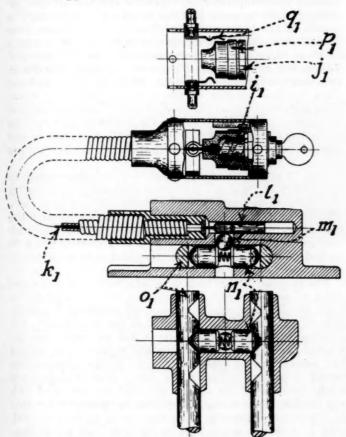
Main Units of the Transmission Lock of Fig. 15 in Locked Position
